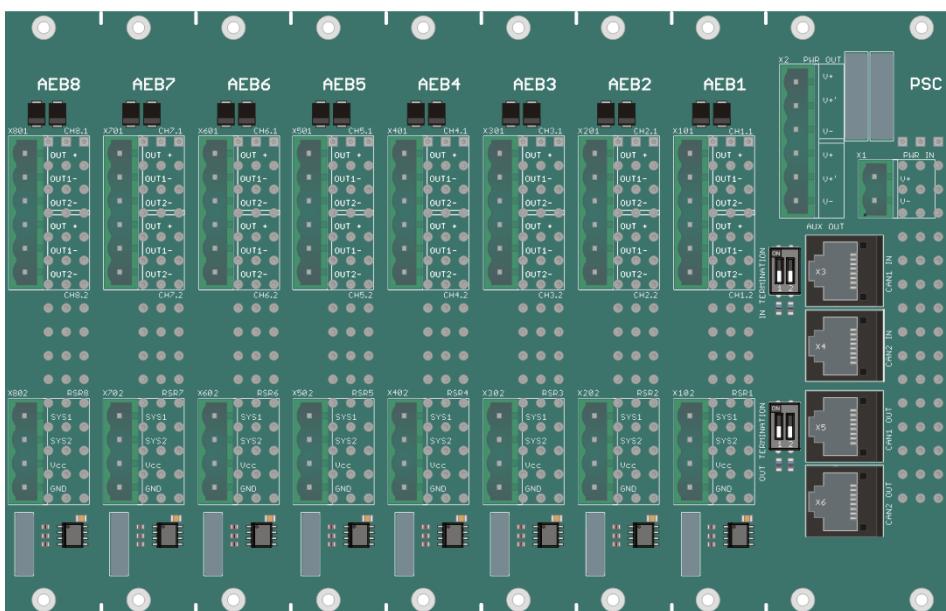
Rear side of the BP-PWR101-8, without cage clamp terminals
